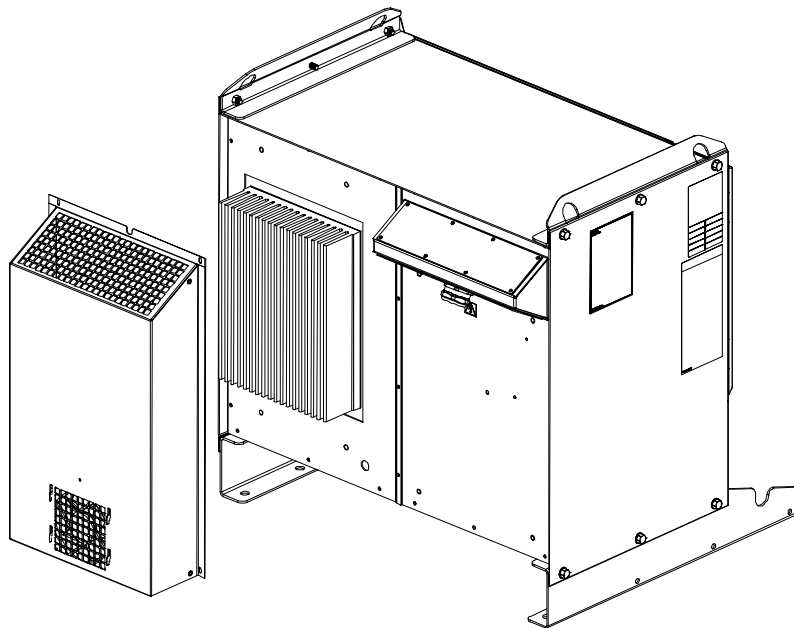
Exploded view drawing showing fan assembly at the rear of the SpotWelding cabinet.
